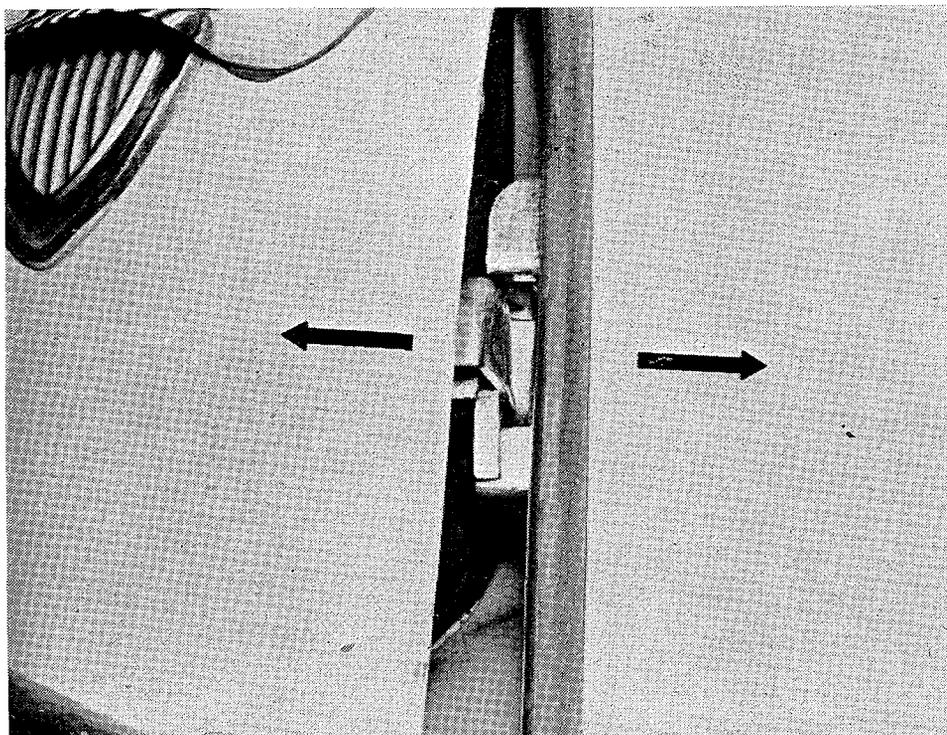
1960 FB Holden door latch. The flange is bent, as in Fig. 9.40, but the latch is still engaged with the striker plate and the door has not opened. The forces on the lock, due to the distortion of the body frame of the car, are in the directions shown by the arrows.
